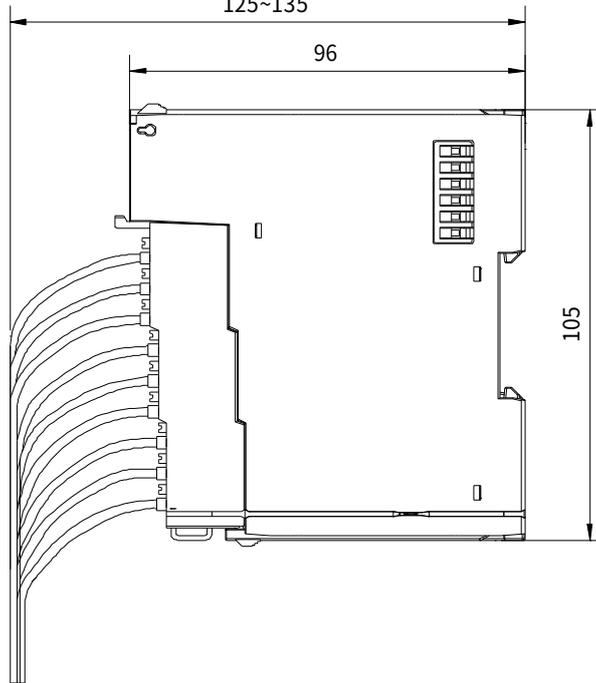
Module installation dimensions set 2 (unit: mm)
